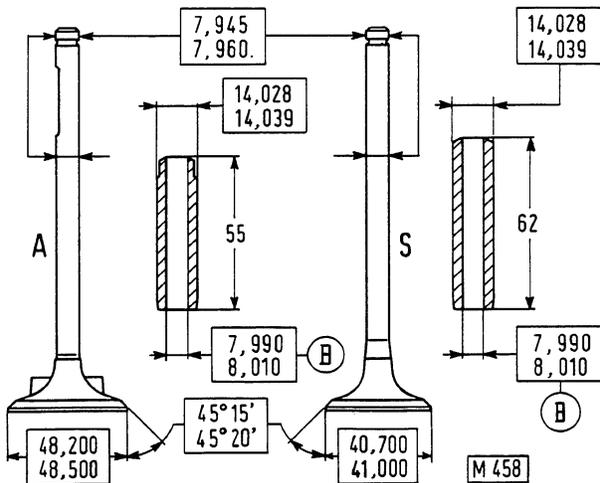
Main dimensions of intake valves (A) and exhaust valves (S) and relevant guides.
